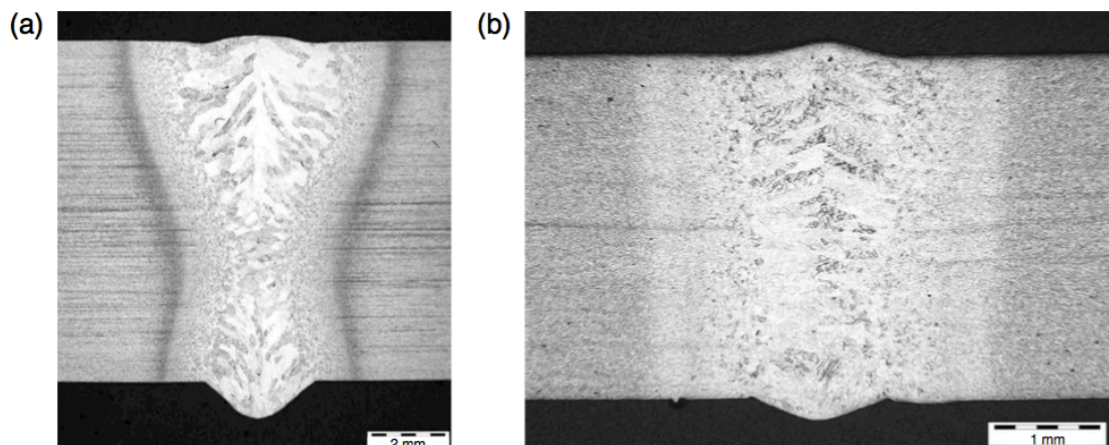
Profiles of keyhole laser welds produced in Ti-6Al-4V, (a) 9.3 mm thickness, and (b) 3.2 mm thickness. Note: different scales (7, p. 92)
